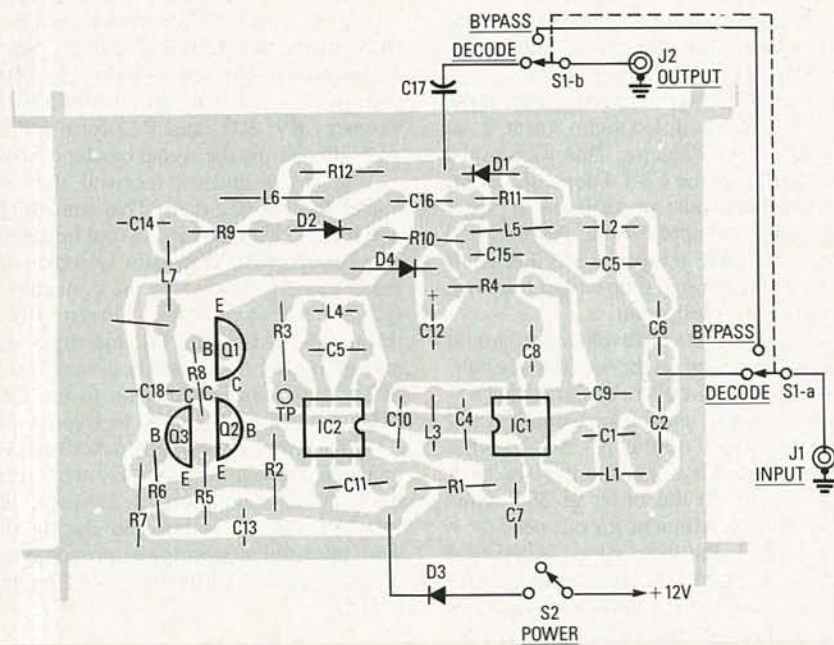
IF YOU USE THE PC PATTERN shown in PC service, use this diagram when mounting the components.
